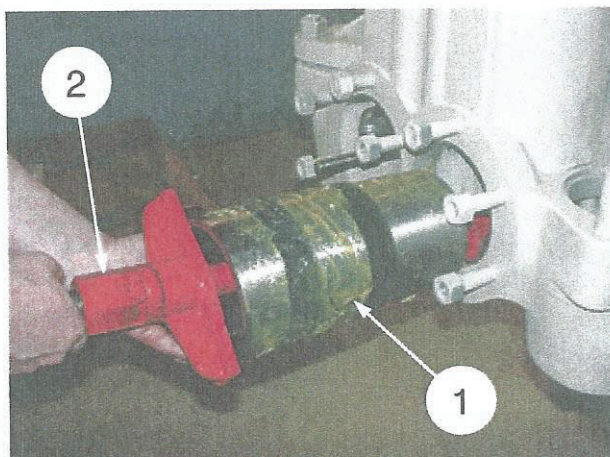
Mud Pump Liner Assembly; When the nut [2] on the puller rod has been tightened sufficiently to free the liner assembly [1], the puller and the liner assembly can be lifted out as shown.
